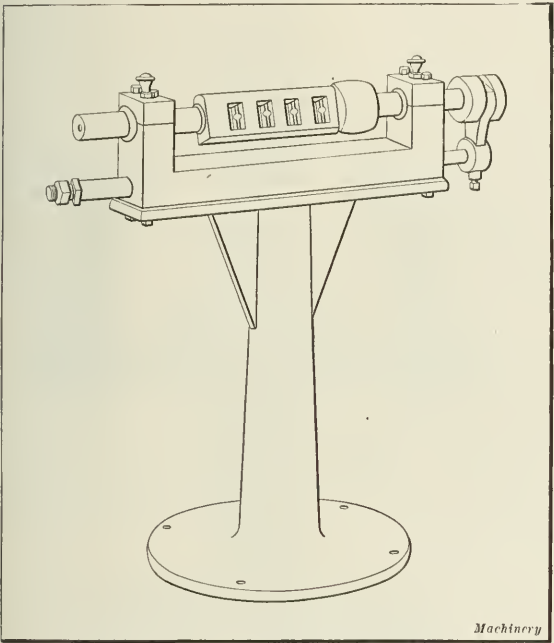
Rotary-oscillating Wire Straightener of Die Type
